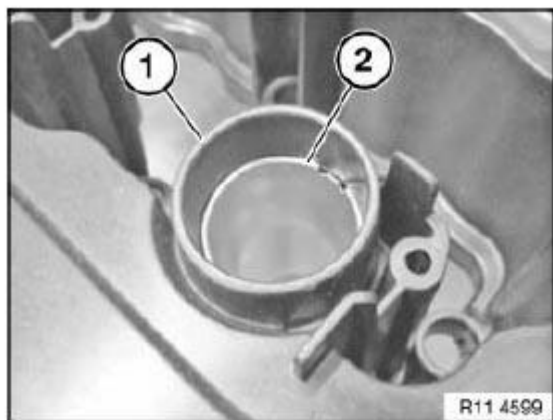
Identifying Slotted Sleeves And Cylinder Head Cover
